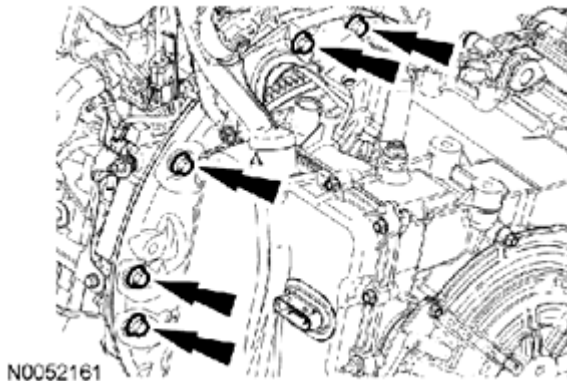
Identifying Oil Pump Chain Drive Tensioner And Shoulder Bolts
